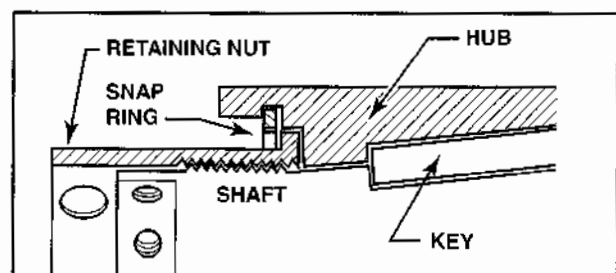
A snap ring is installed inside a propeller hub mounted on a tapered or splined shaft to aid in removing the propeller from the shaft.
